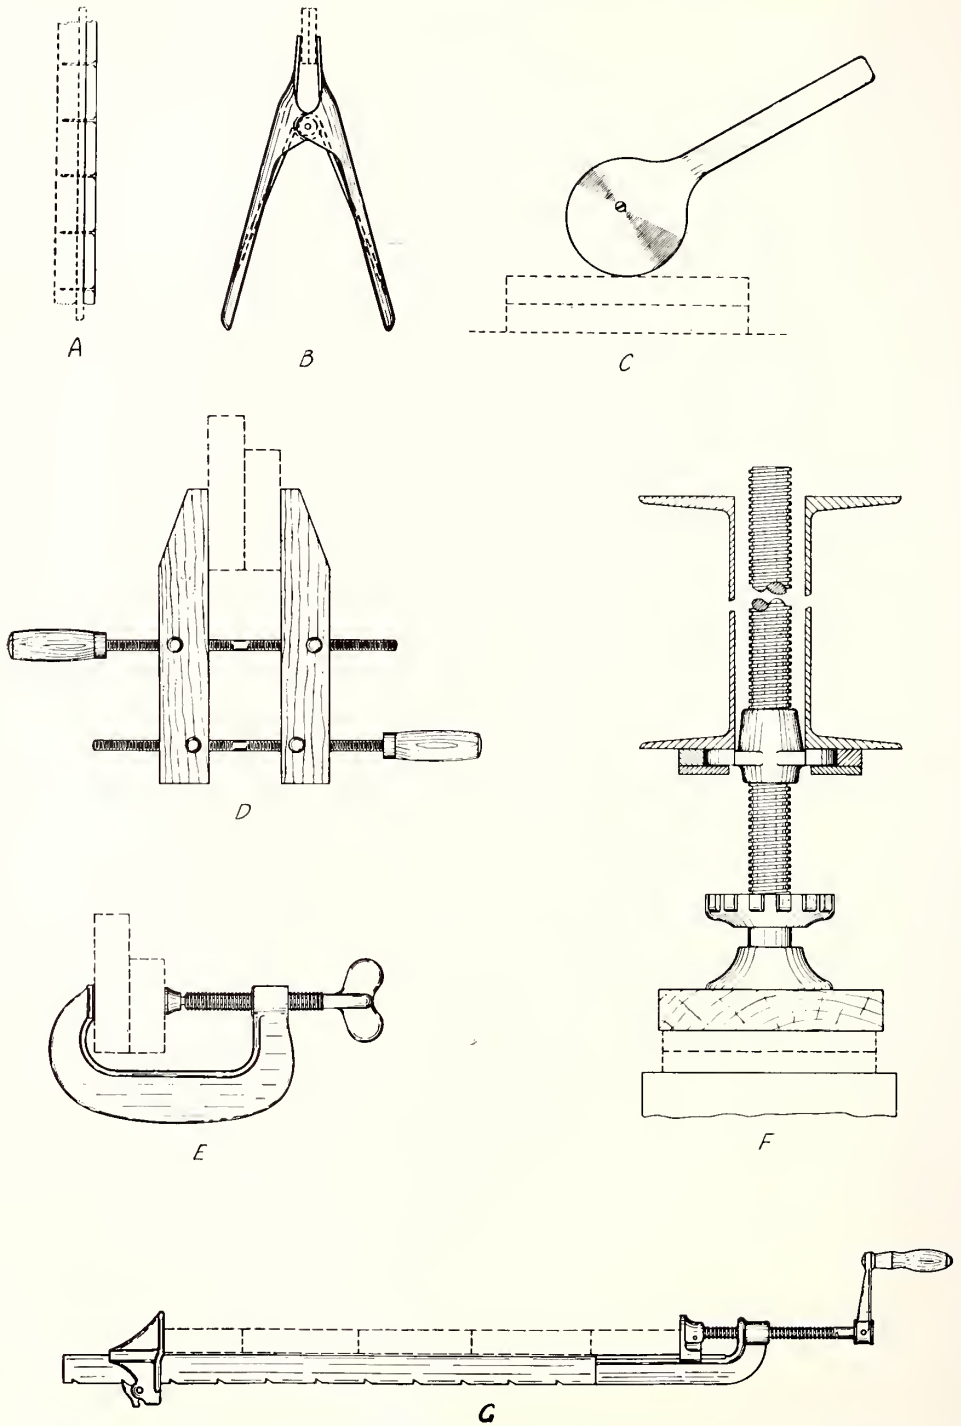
Hand devices used in applying pressure to glue joints: *A*, brads, screws, or nails; *B*, spring clamp; *C*, eccentric clamp; *D*, wood clamp; *E*, C-clamp; *F*, jackscREWS; *G*, bar clamp.
